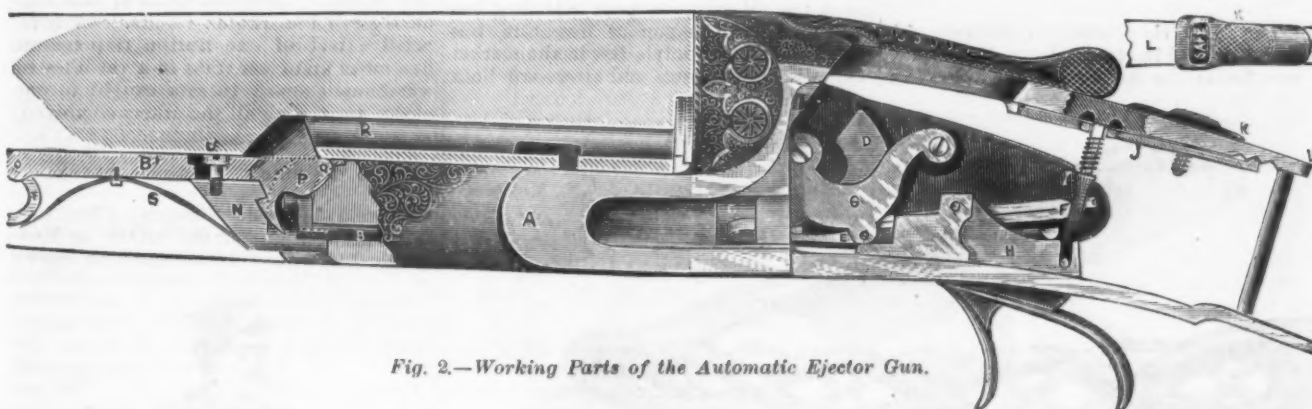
Working Parts of the Automatic Ejector Gun.
